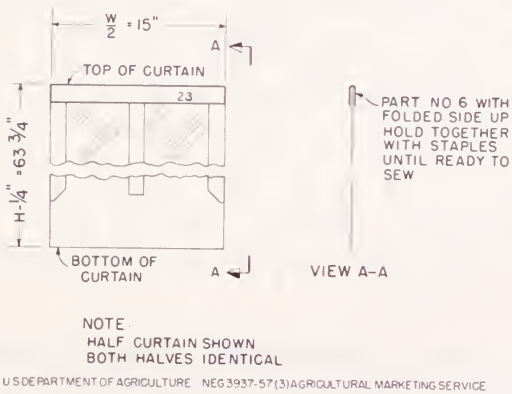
Assembly of part No. 6 to curtain for a 30" x 64" door opening.
